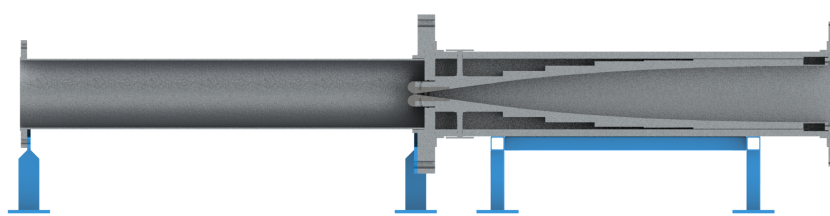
Full assembly of the variable Mach number planar nozzle, section view.
